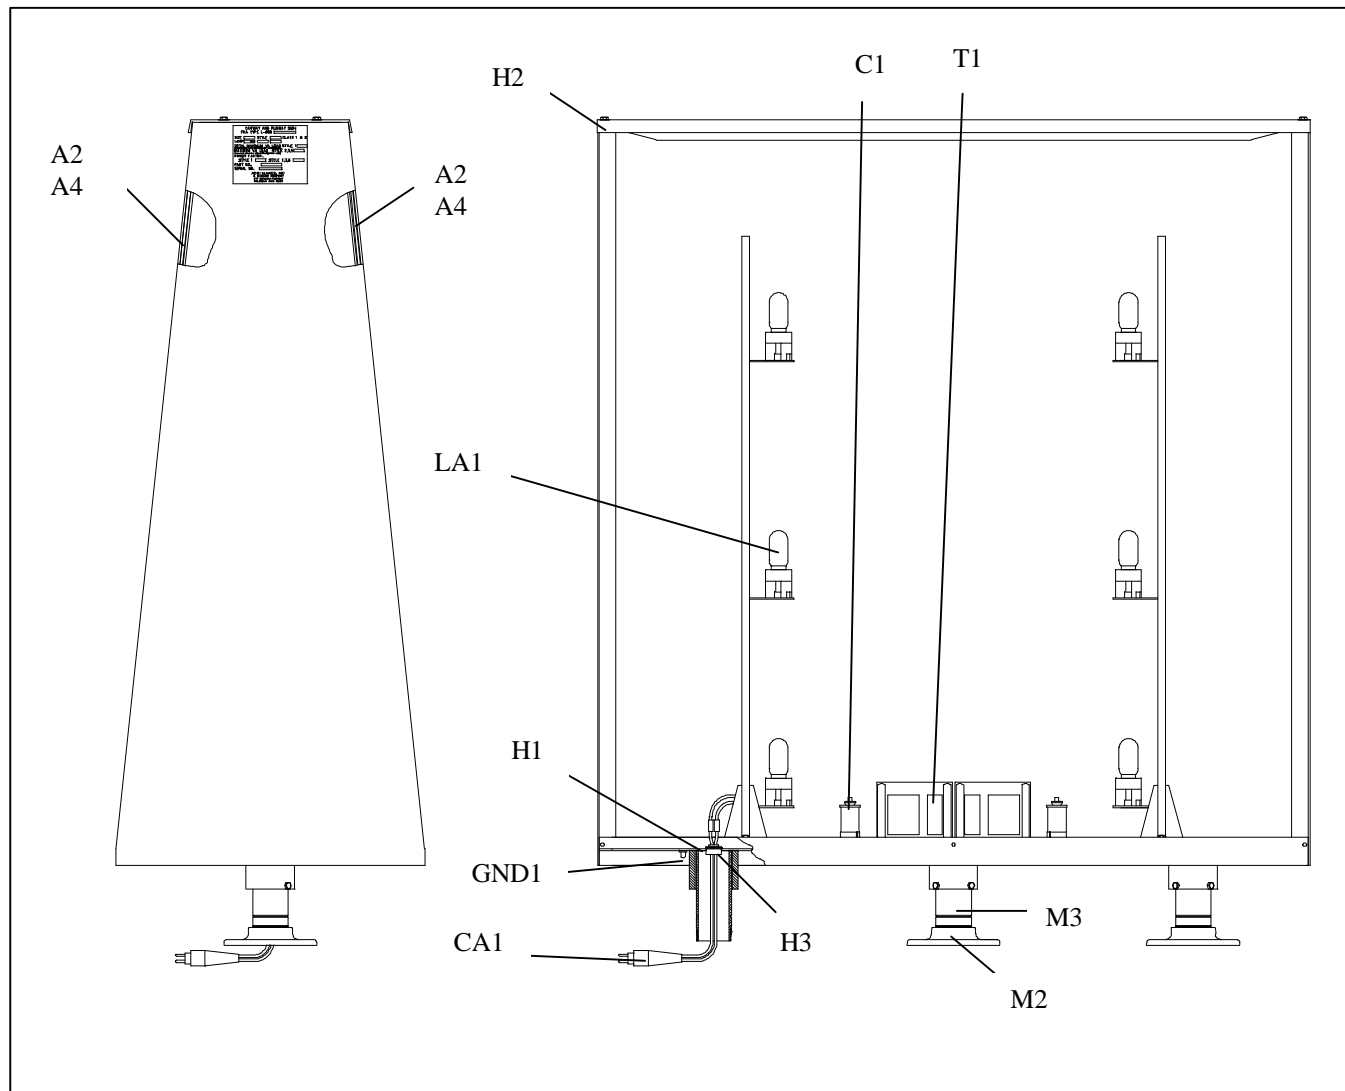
L-858 Sign Module Assembly (Size 4, One-Module)
